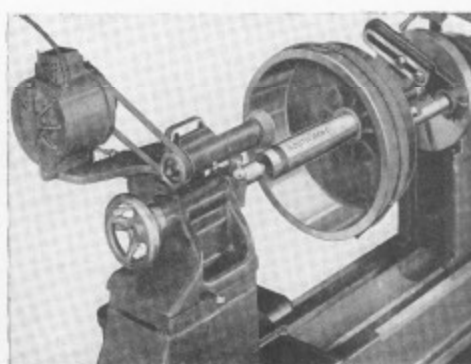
Grinding a Brake Drum in the 36" Lathe Using the Electric Grinding Attachment.
